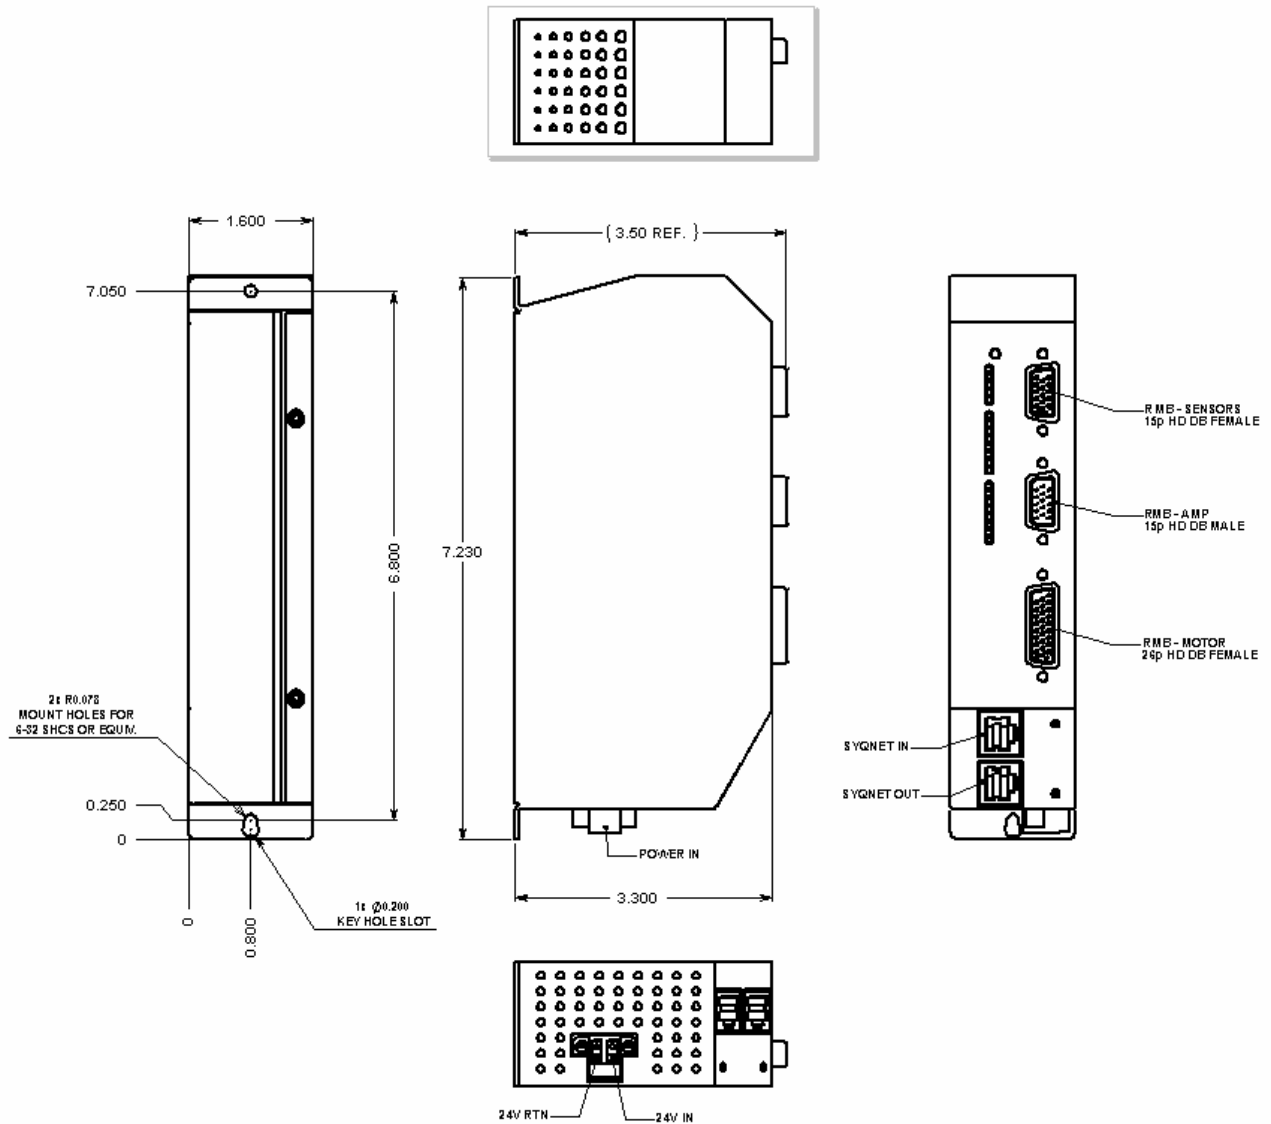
TA801 MECHANICAL DIMENSIONS
